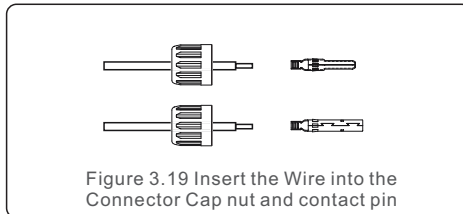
Insert the Wire into the Connector Cap nut and contact pin
